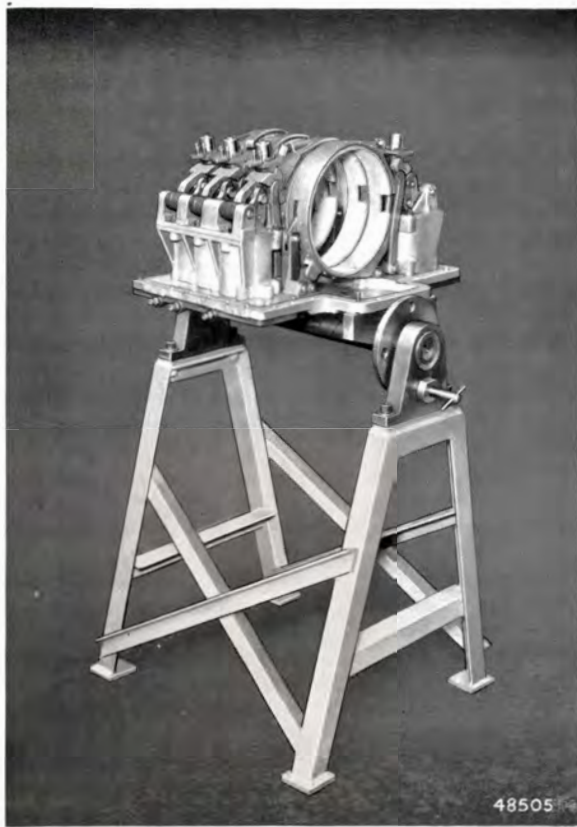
BOTTOM COVER AND BRAKE BAND ASSEMBLY
